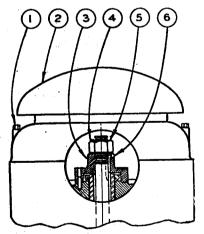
Vertical hollow shaft motor Item (5) is adusting nut
